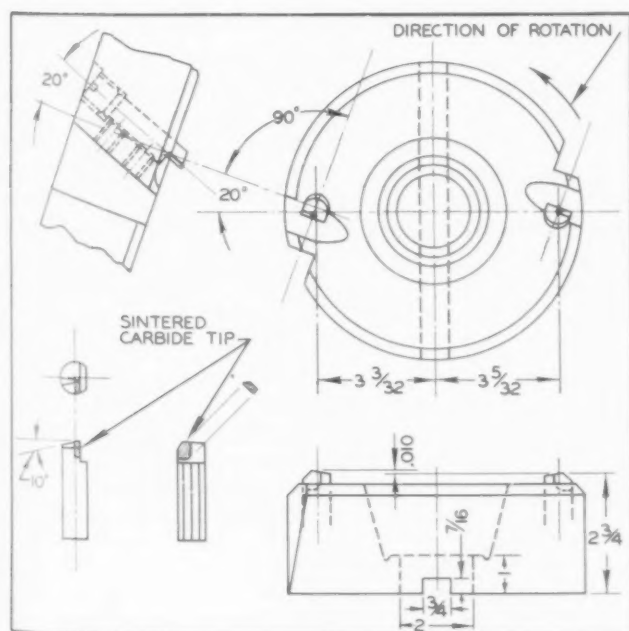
Special two-tooth sintered carbide tipped face milling cutter for light alloys.
